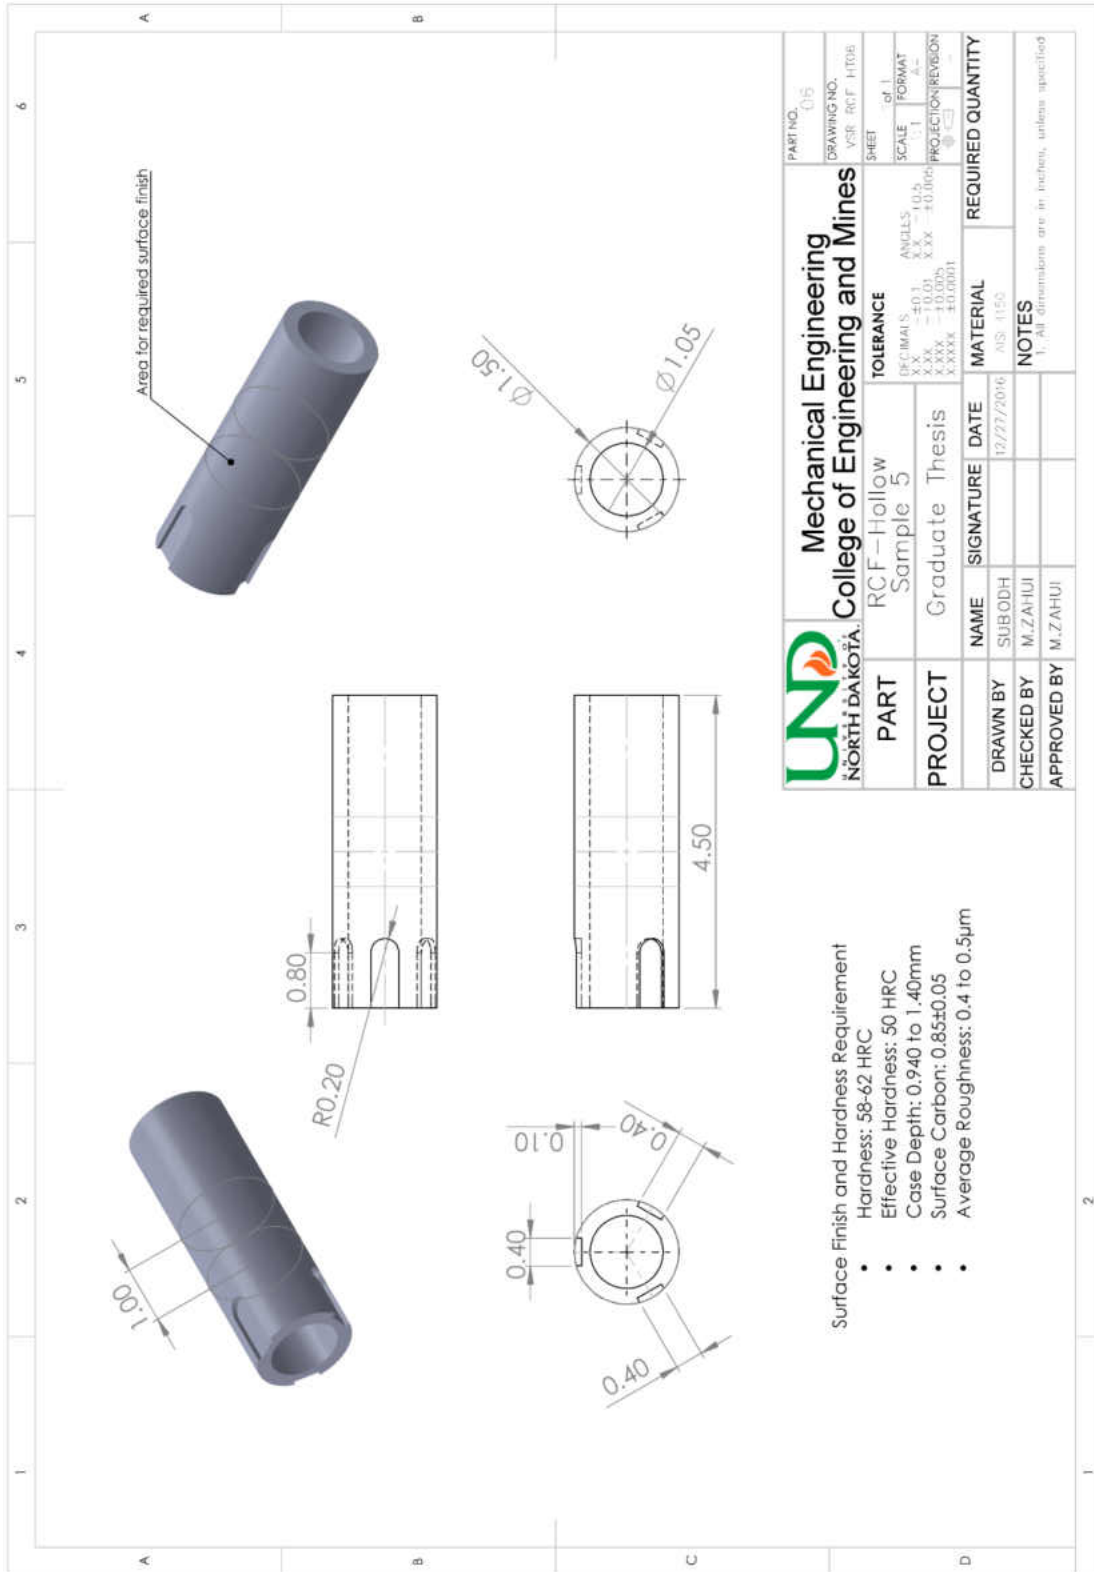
Manufacturing Drawing for RCF Testing of 70% Hollow Specimen.
